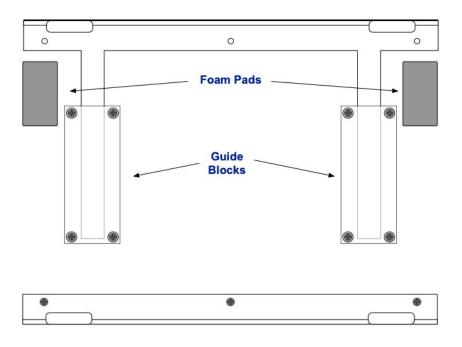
Optional foam pads installed to push iPad into the mounting tabs.
